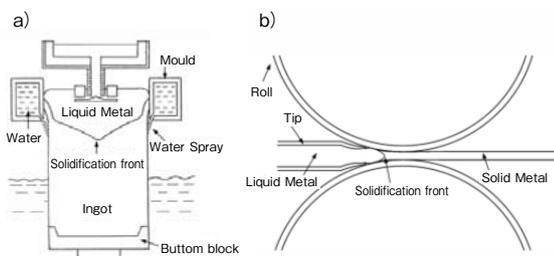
Schematic view of (a) the direct chill casting machine and (b) the twin-roll continuous casting machine.
